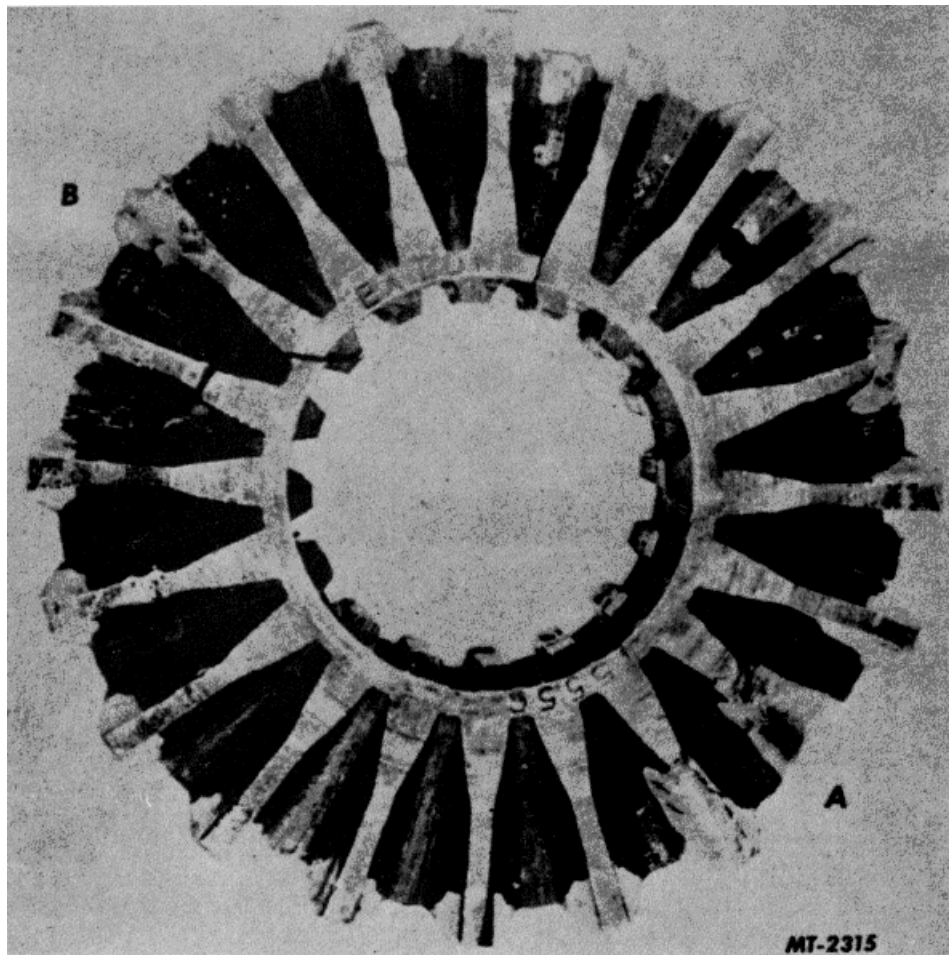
Fatigue Fracture-Differential Side Gears
